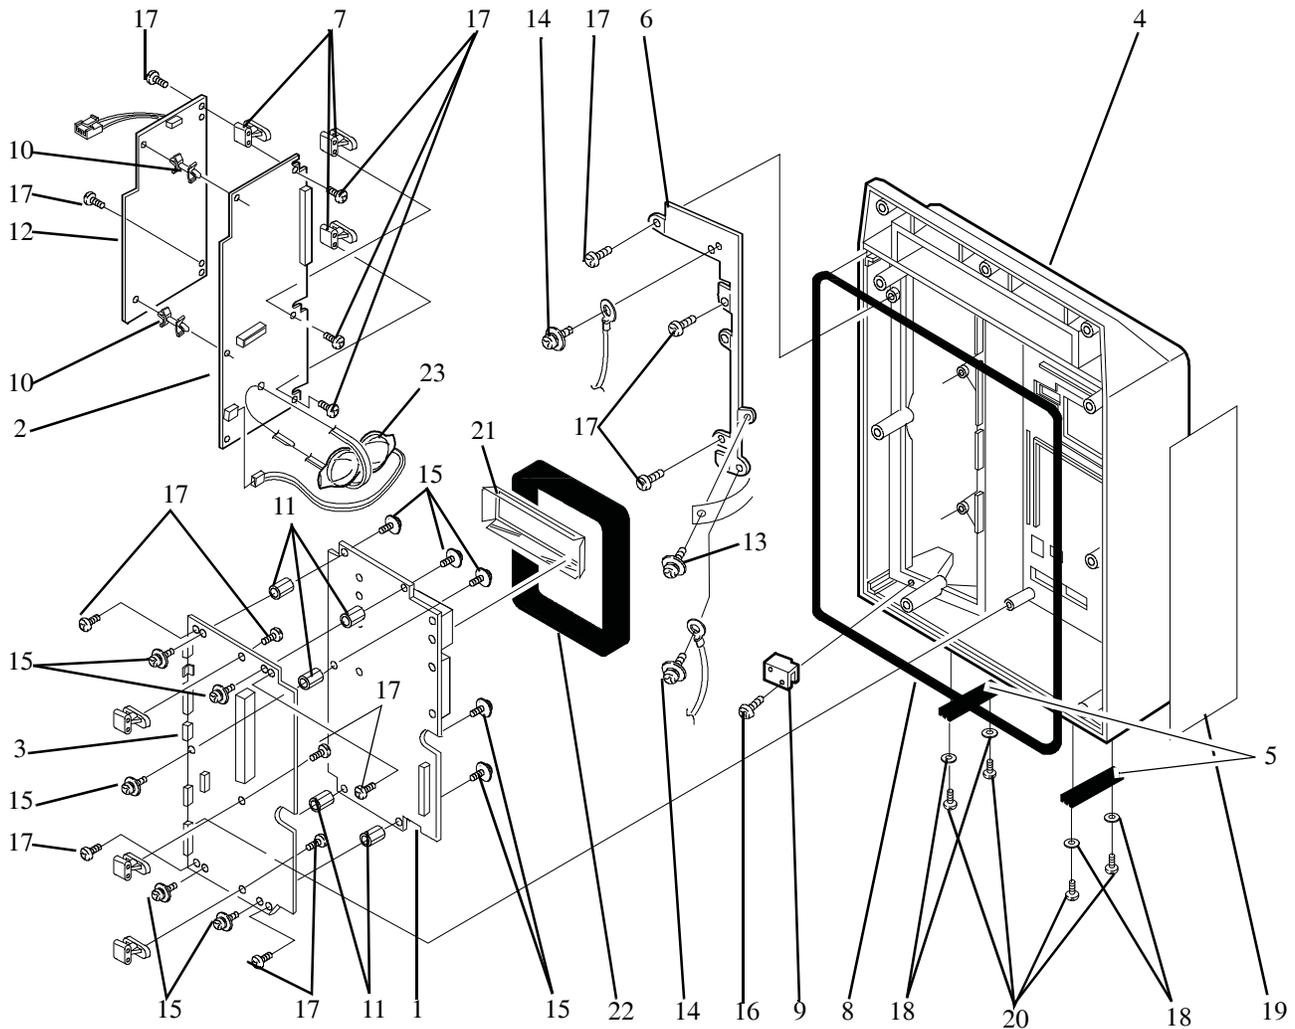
Front Housing Assembly (F049990010) - Rear View
